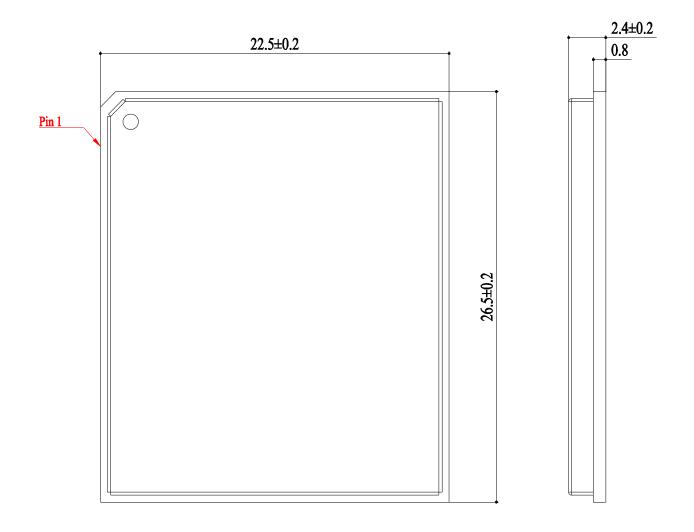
EG916Q-GL Top and Side Dimensions (Unit: mm)
